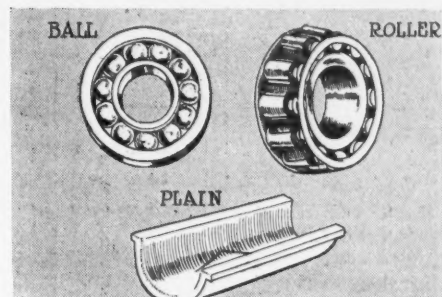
BALL, ROLLER AND PLAIN BEARINGS
